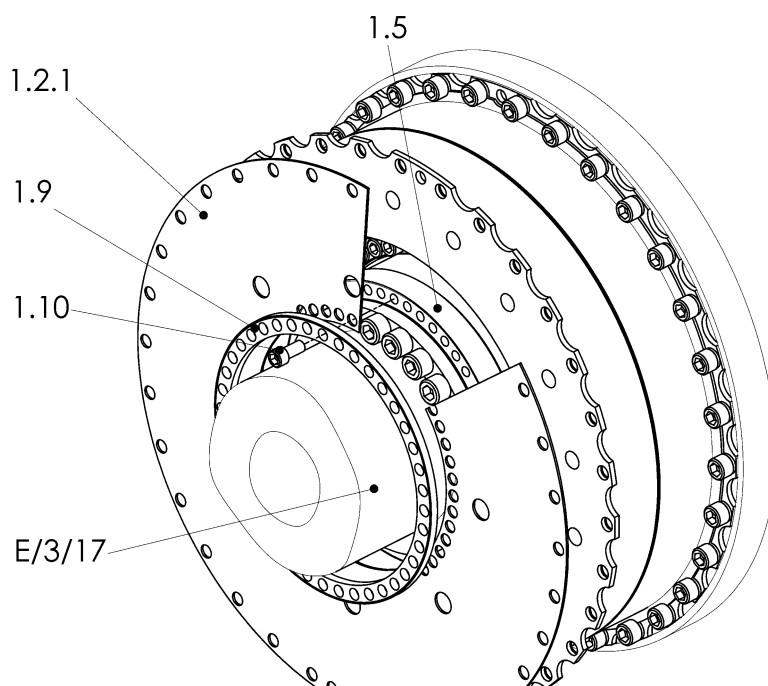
Mounting the membrane (coupling sizes 00050...00075)
